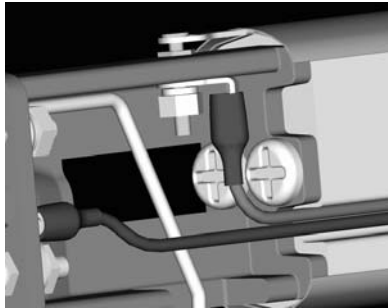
Post Style Seal Wire Attachment (obsolete)
